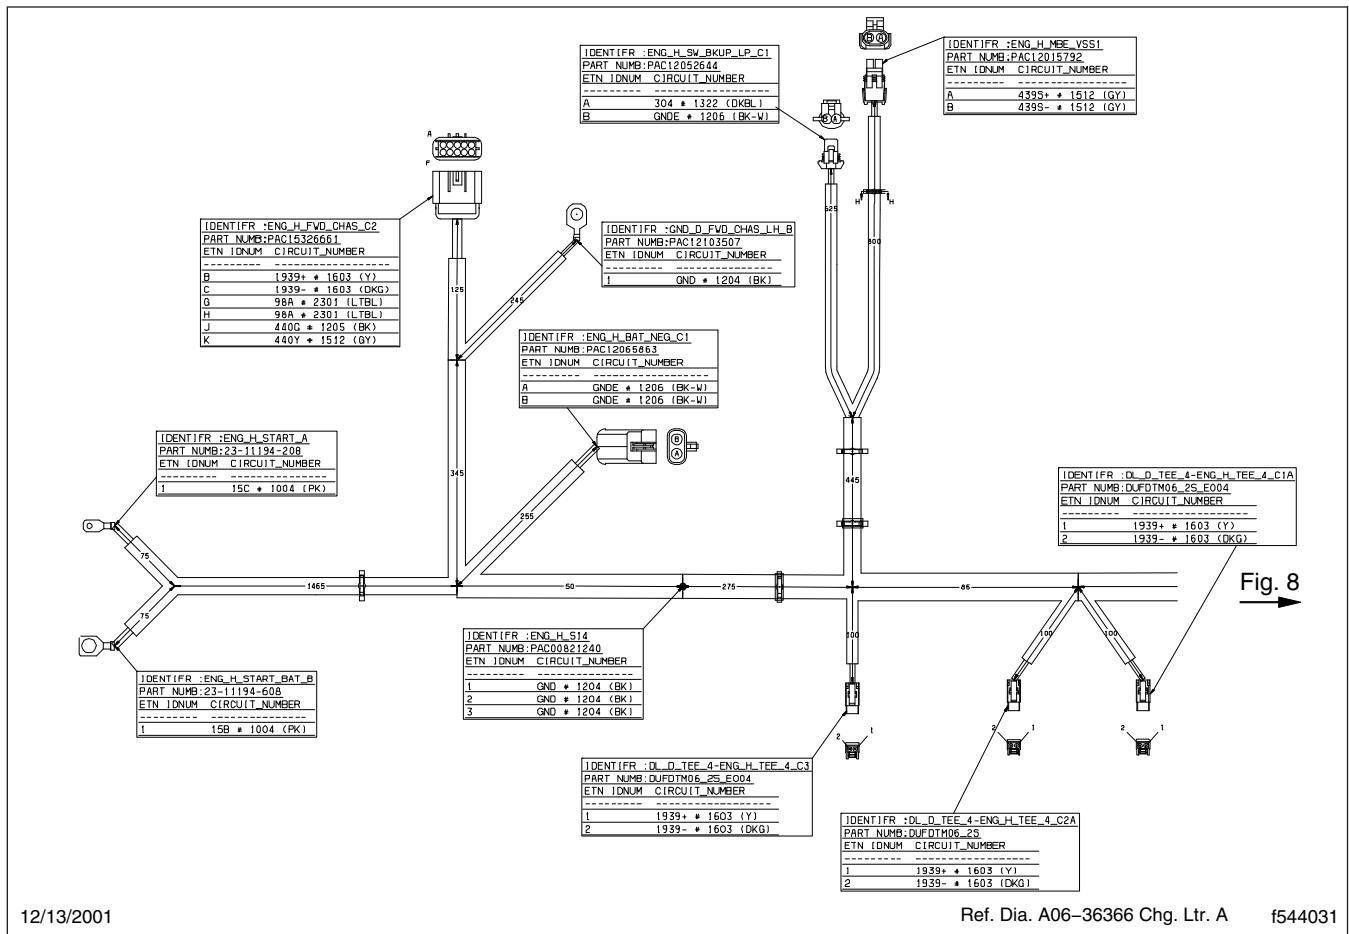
, MBE900 Engine Harness, Automatic Transmission (detailed view, engine connector end)
